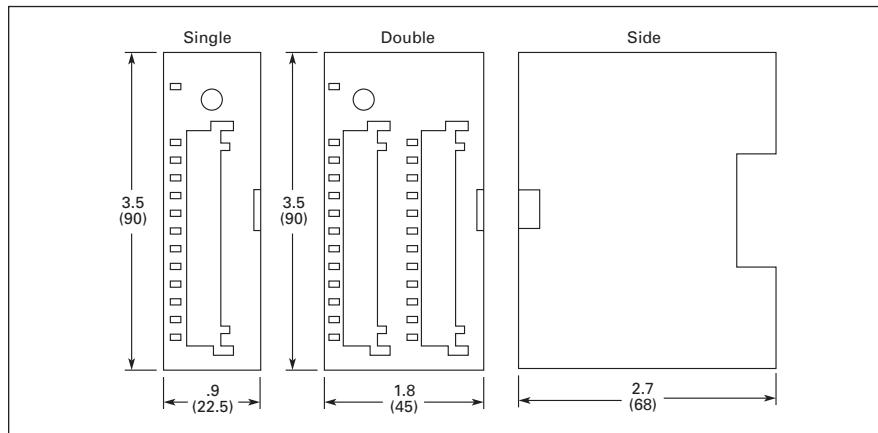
I/O Module — Approximate Dimensions in Inches (mm)
